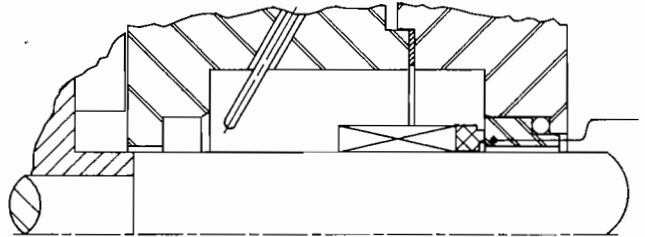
Enlarged Cylindrical I Seal Chamber, Pump A.
